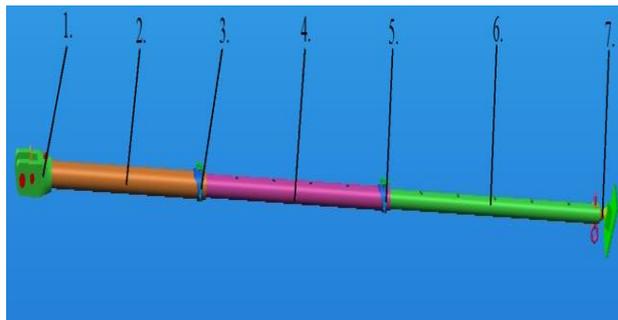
Support subassembly; (1- cylindrical hinge, 2, 4, 6 –telescopic legs (sections), 3, 5- locking sections system, 7- support and anchoring system).
